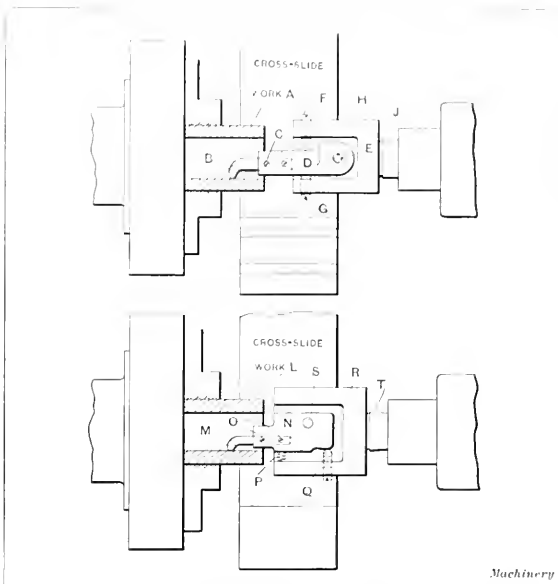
Two Types of Adjustable Boring Tools for Tool-room Work
